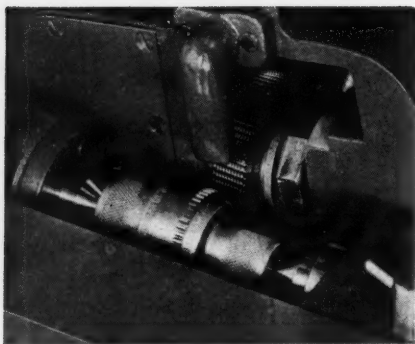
Gear, mounted on quick-assembly mandrel, being finished on Michigan No. 861-4B Gear Finishing Machine
